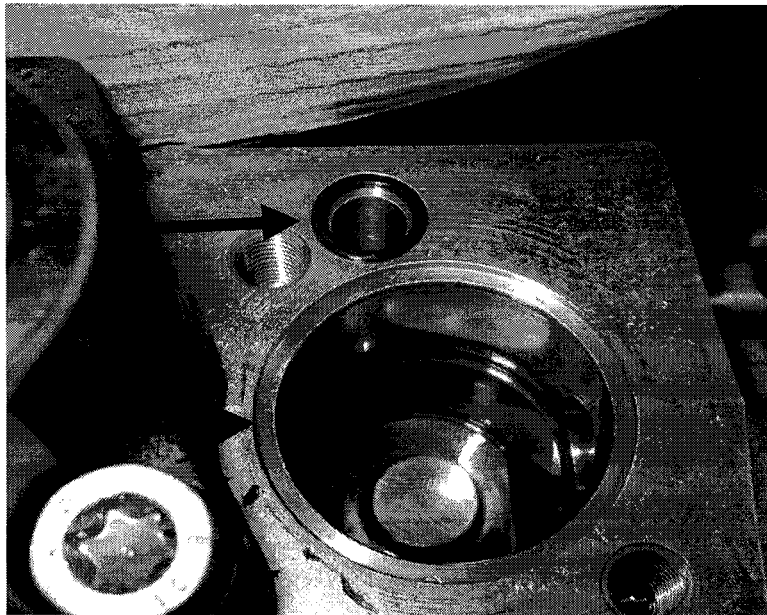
Cleaning Of High Pressure Fuel Pump Element Sealing Surface
